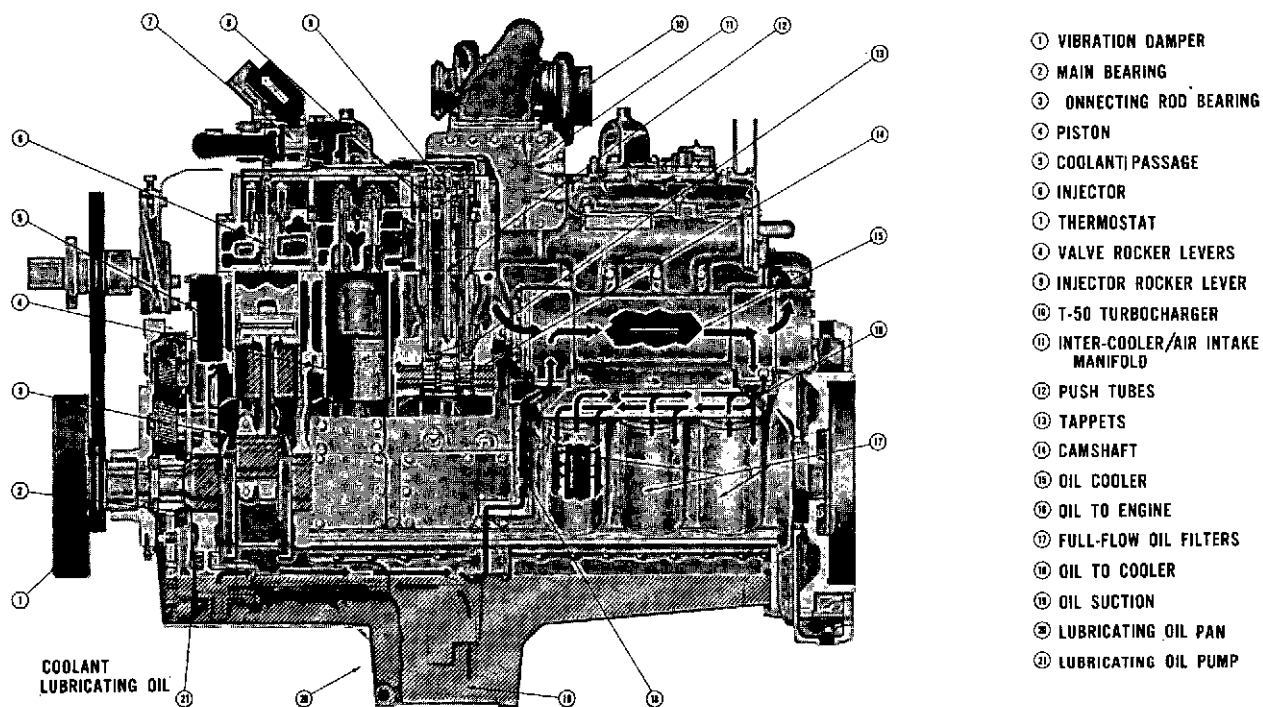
, LWC 14. Oil flow—engine side view
